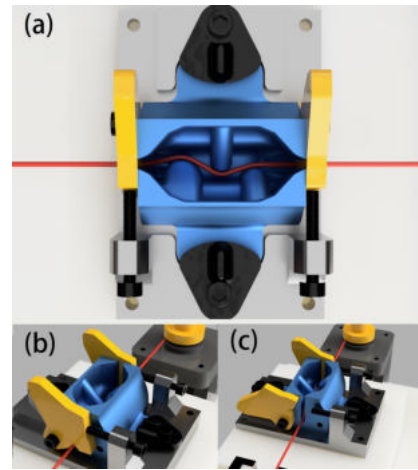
Cartridge (a) top view, (b) side view with gate open, and (c) side view with gate closed.
